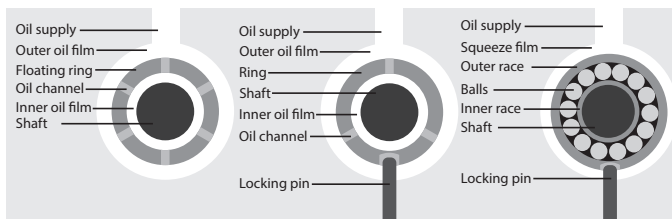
Schematic cross-sectional views of the three conventional bearing systems used in automotive turbochargers: the floating ring bearing (left), the semi-floating ring bearing (middle) and the ball bearing (right). The (semi-) floating ring bearing have a separate thrust bearing to support the axial forces coming from the compressor wheel and turbine wheel.
